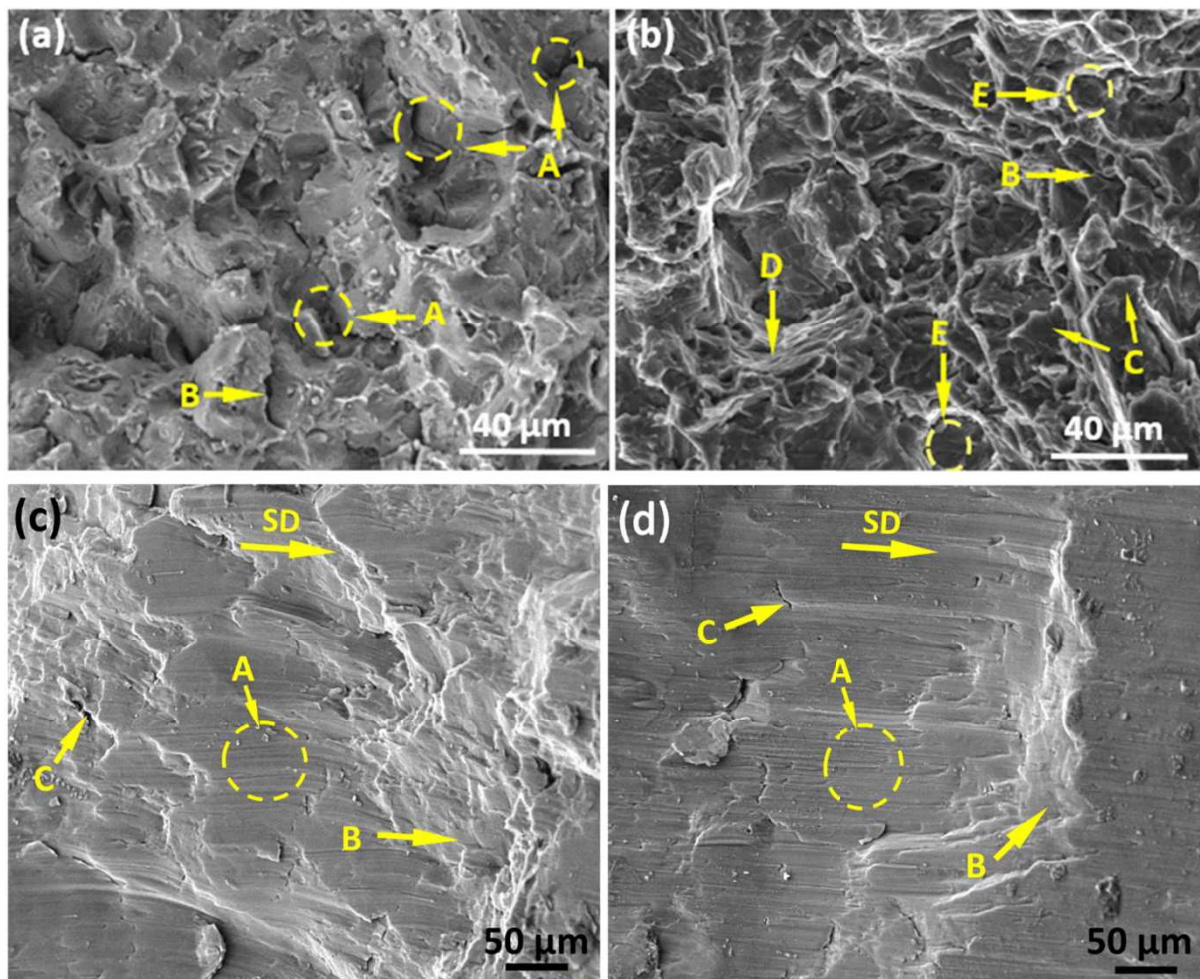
Fracture surfaces of the tensile tested (a) AXM520 alloy, and (b) NC2.0SiC; fracture surfaces of the compression tested (c) AXM520 alloy, and (d) NC2.0SiC ('SD' shear direction).
